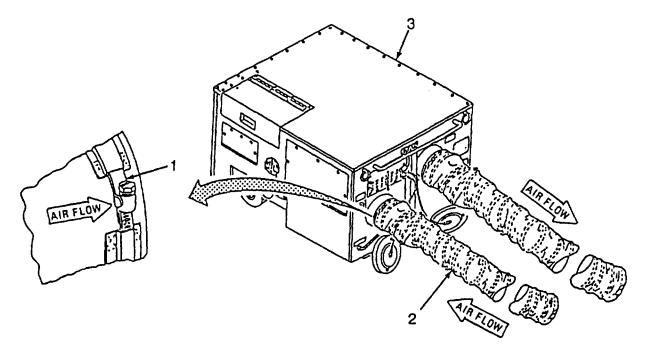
Duct Assembly (Sheet 2 of 2)
